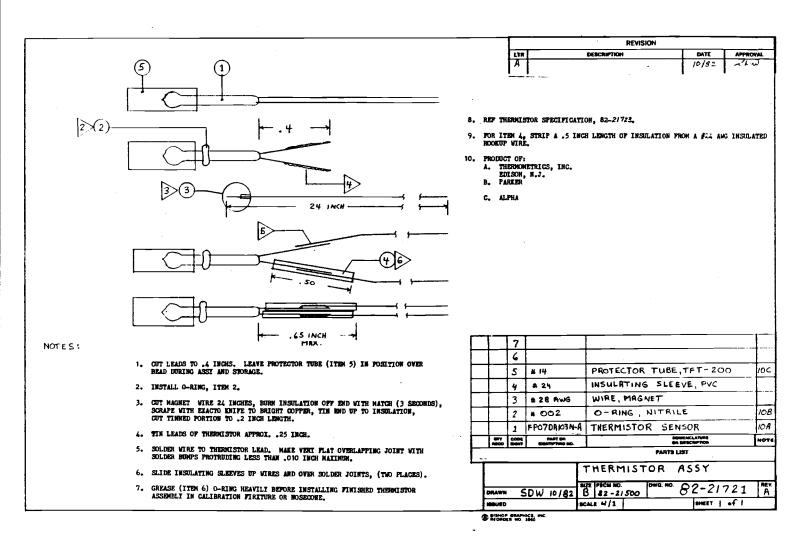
Thermistor assembly drawing (dwg no. 82-21721).
